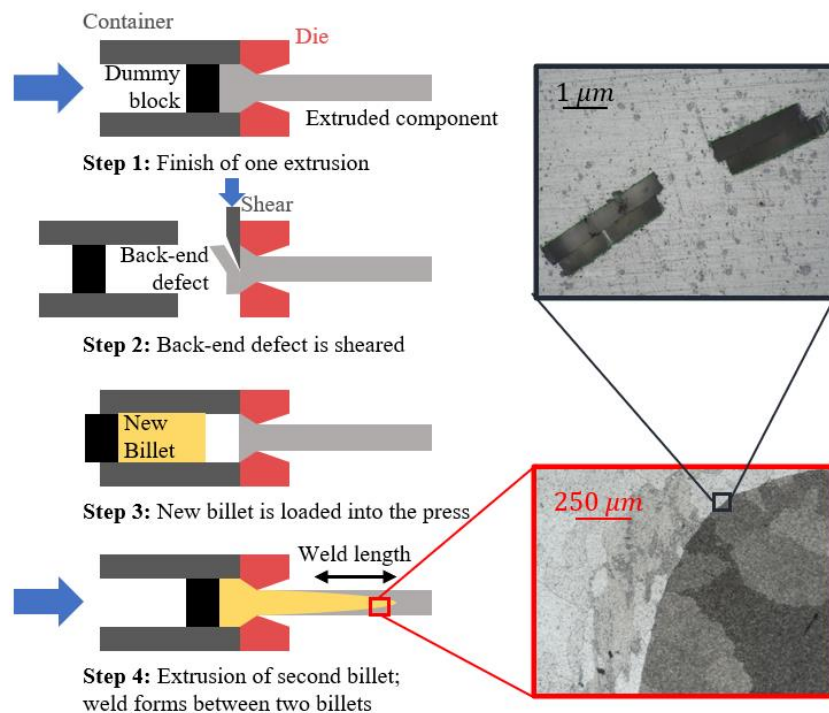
The formation of a transverse weld in a solid aluminum profile extruded from single-piece billets. Note: The micrographs are on welds created using anodized billets.
